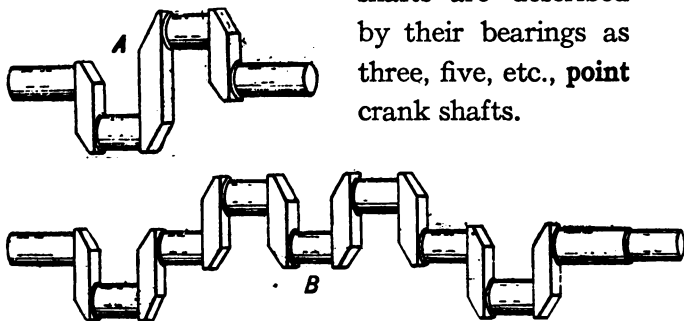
A*, Two-throw crank shaft; *B*, four-throw crank shaft, 180°.
